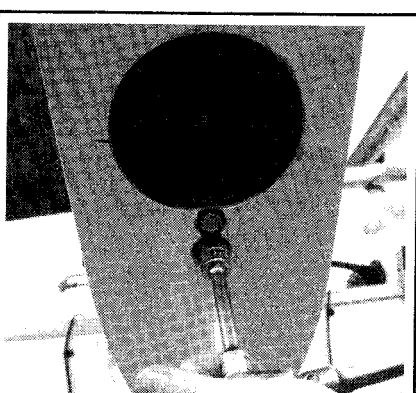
Use a socket to remove the forward gearcase retainer. . .
